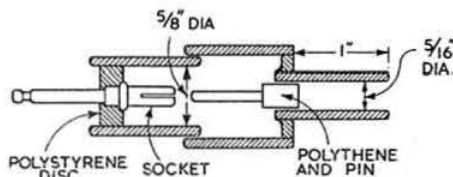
Construction of co-axial plugs and sockets for 100 ohm line.
